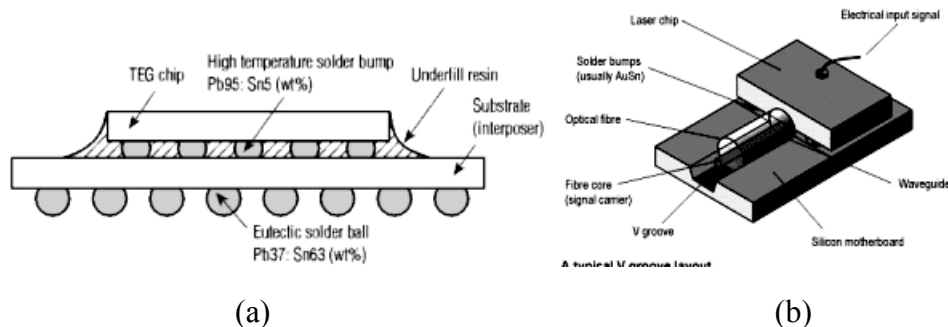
Applications of flip chips: (a) flip chip BGA structure (courtesy of Oki Electric Industry Co. Ltd); and (b) V-groove fiber alignment using reflowed Au-Sn solder bumps (courtesy of Karl Suss).
